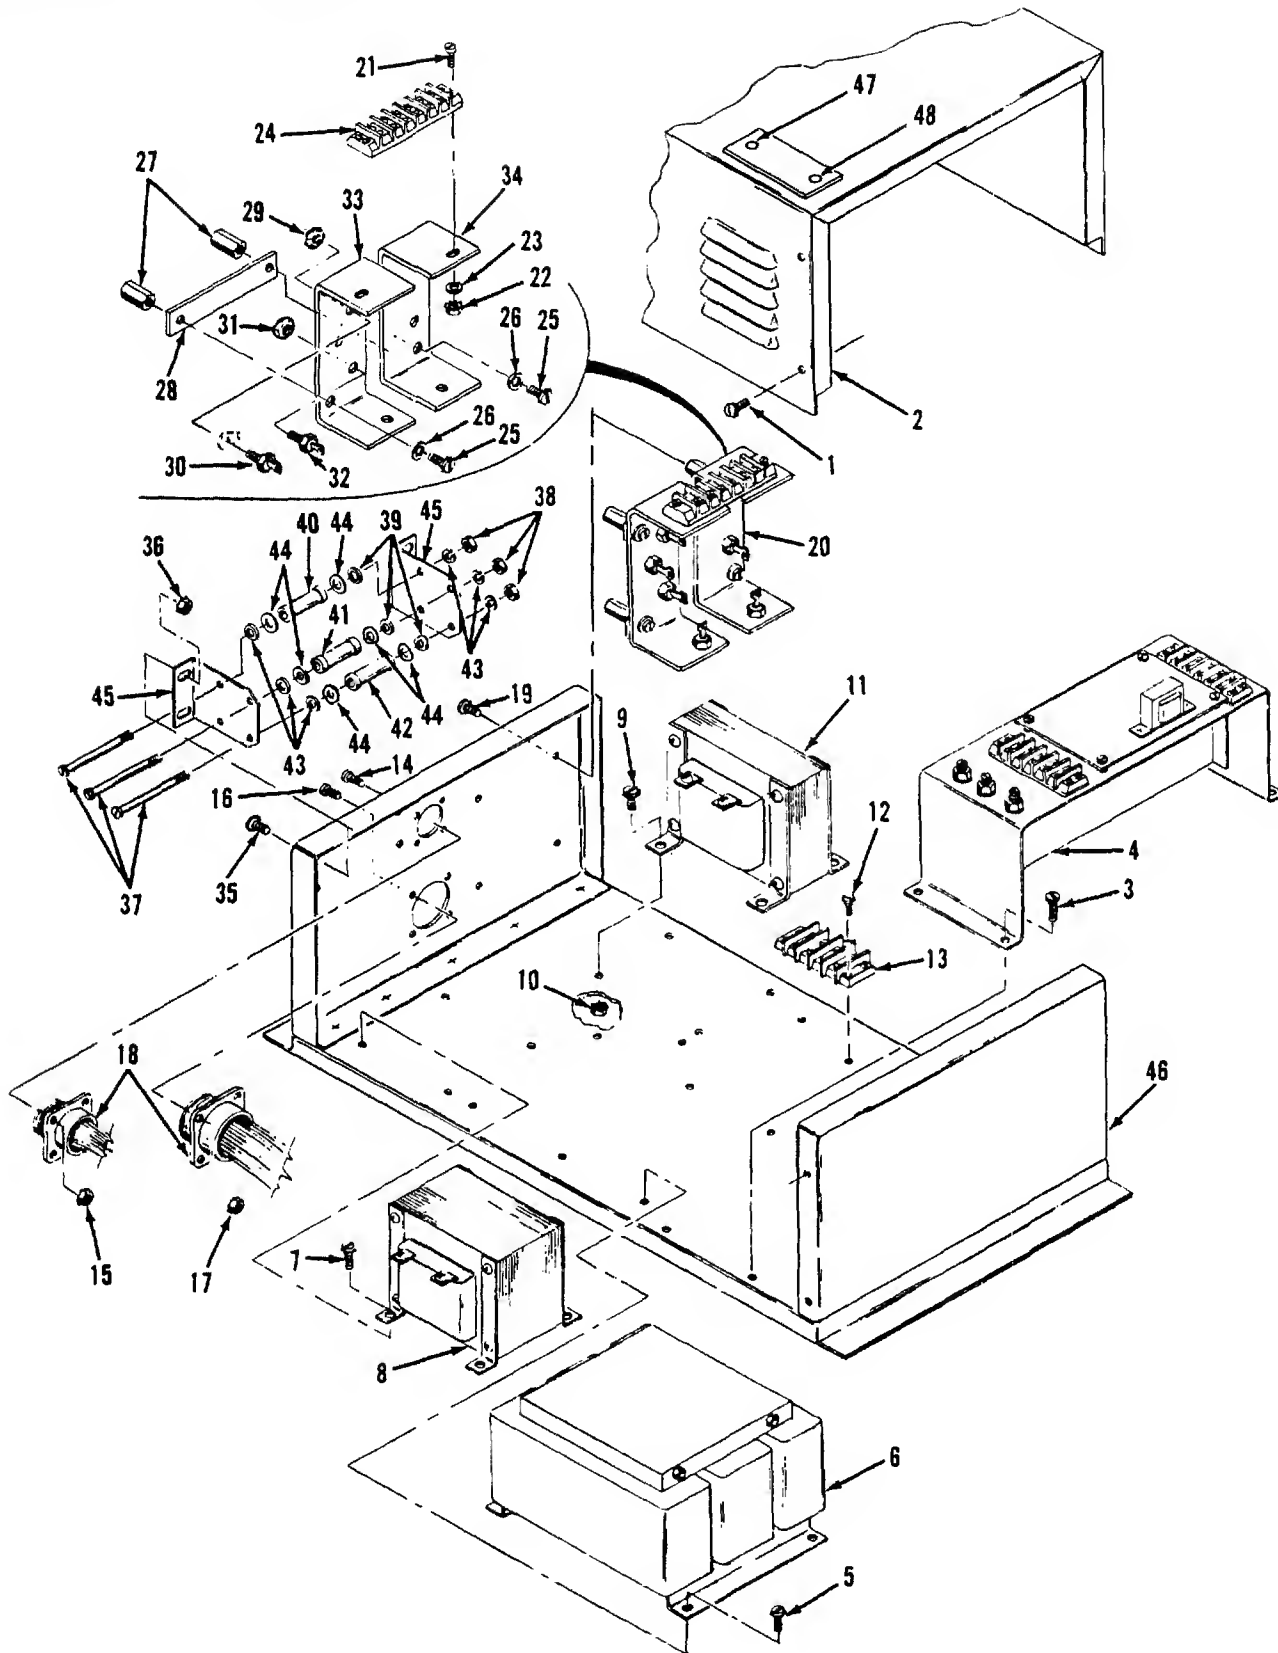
Exciter-Regulator, A11, Exploded View (Sheet 1 of 2)
